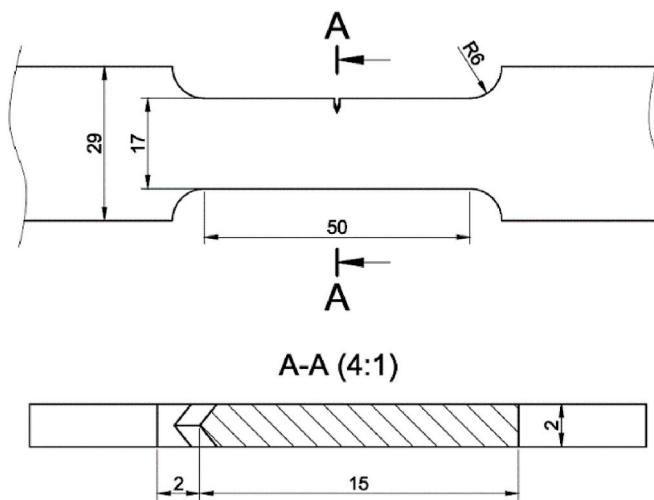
Main dimensions of the gauge section of dynamic SENT specimen.
